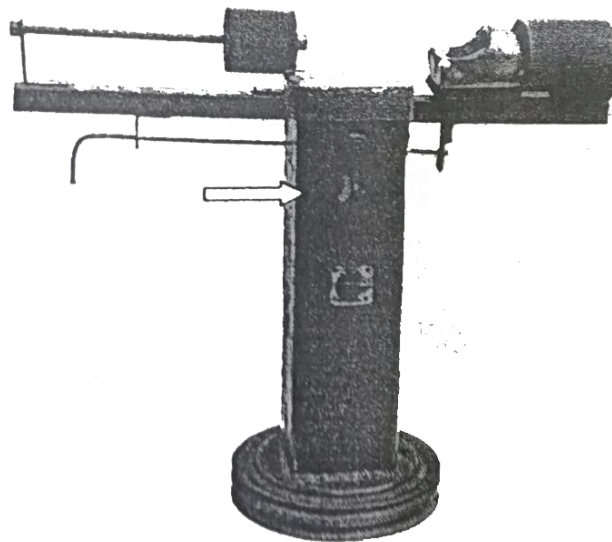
Photograph of the prototype casting device (trigger bar arrowed, crucible arm under tension)
